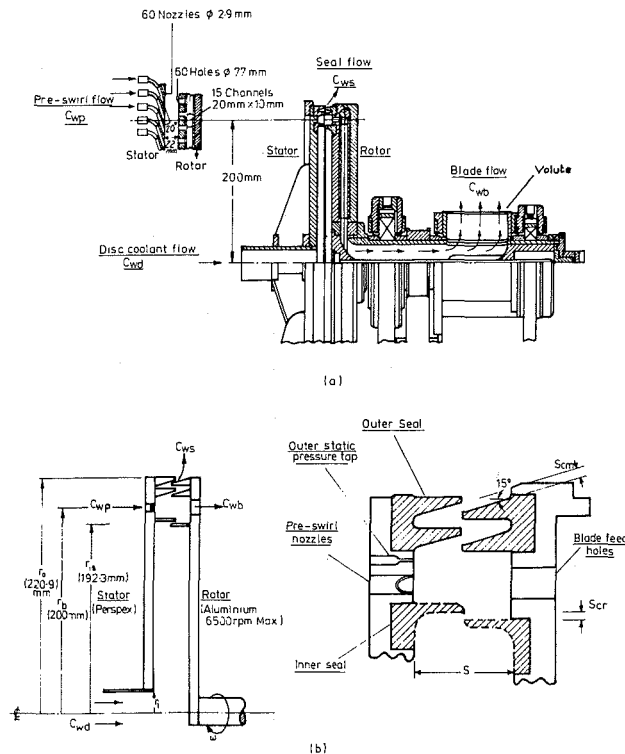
(a) General arrangement of the preswirl rotor-stator rig; (b) schematic diagram of the rotor-stator cavity and details of the rim and inner seals
